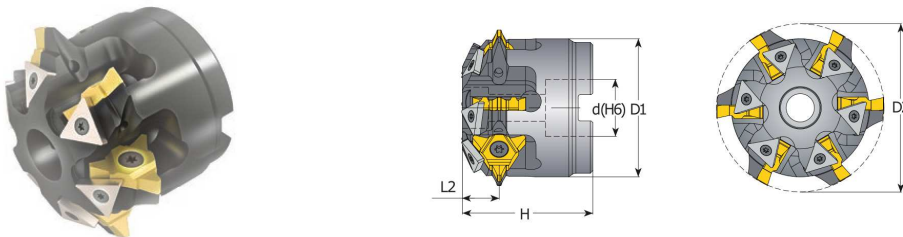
Gear milling toll. Image for illustration only. Final D1 and D2 values will be supplied with the toolholder. D2=80, [57].
